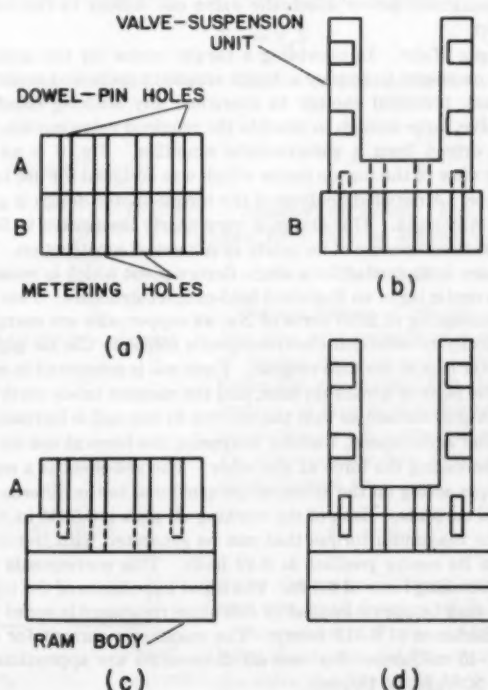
USE OF DRILLING AND REAMING JIGS IN MAKING SUSPENSION VALVE
